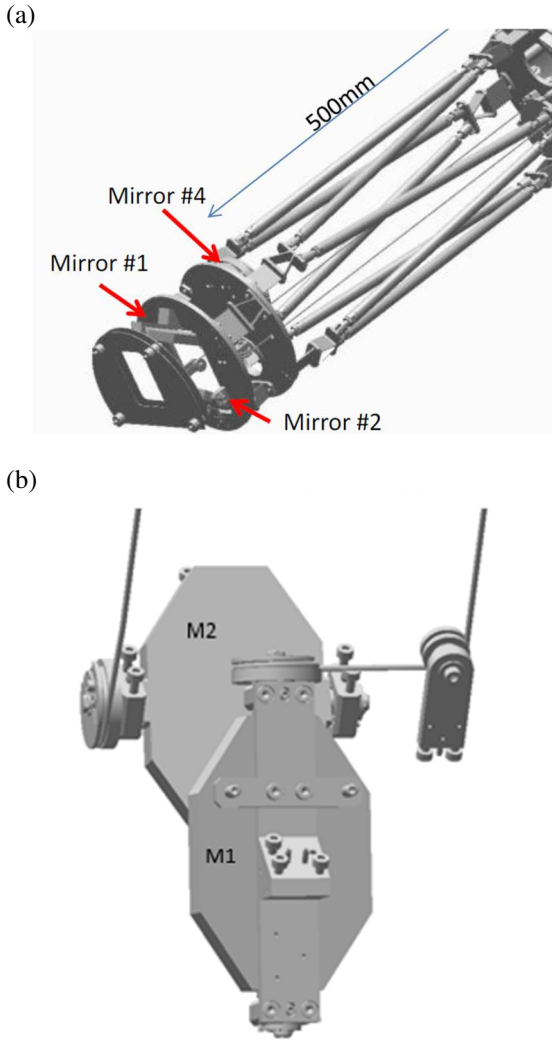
(a) Mechanical design of the lower part of the endoscope. (b) CAD view of mirror rotating axis actuated by stainless steel cable via pulleys
